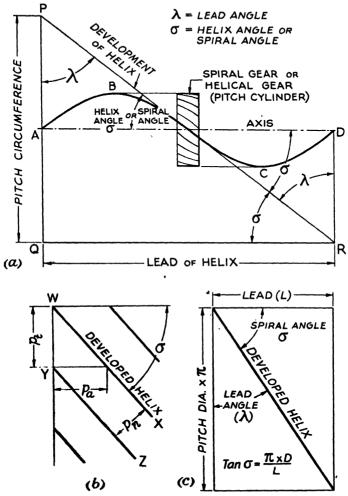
TERMS EMPLOYED IN CONNECTION WITH HELICAL GEARS
